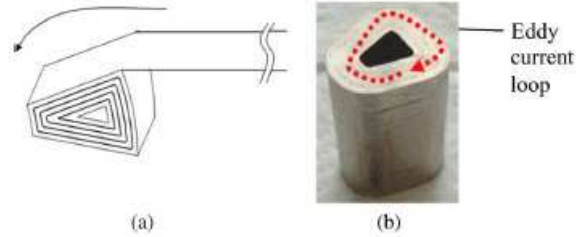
(a) wrapping process, (b) Moulded AMM core.
